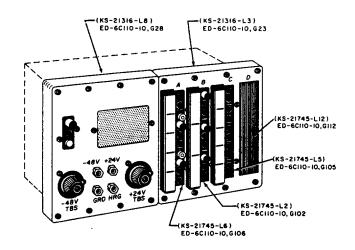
ED-6C110-10, G23 Test/Talk Panel For COSMIC-Type Frames (Front Face)
